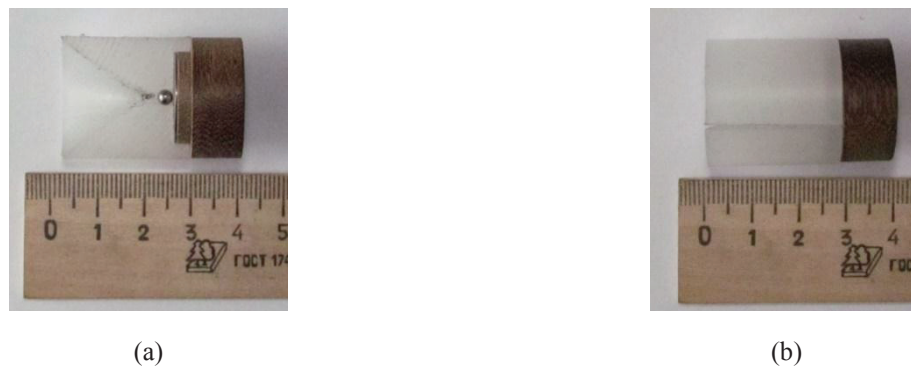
Kit of parts of hurled assembly with the use of polyethylene and textolite (a) and complete assembly with a spherical element of 23 mm caliber (b)
